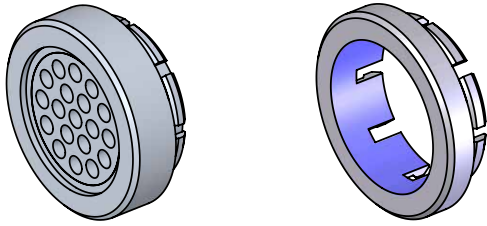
Patented flame guard Type 6539A1Q01, diaphragm protection ring Type 6539A2 (both can be mounted without tools)
